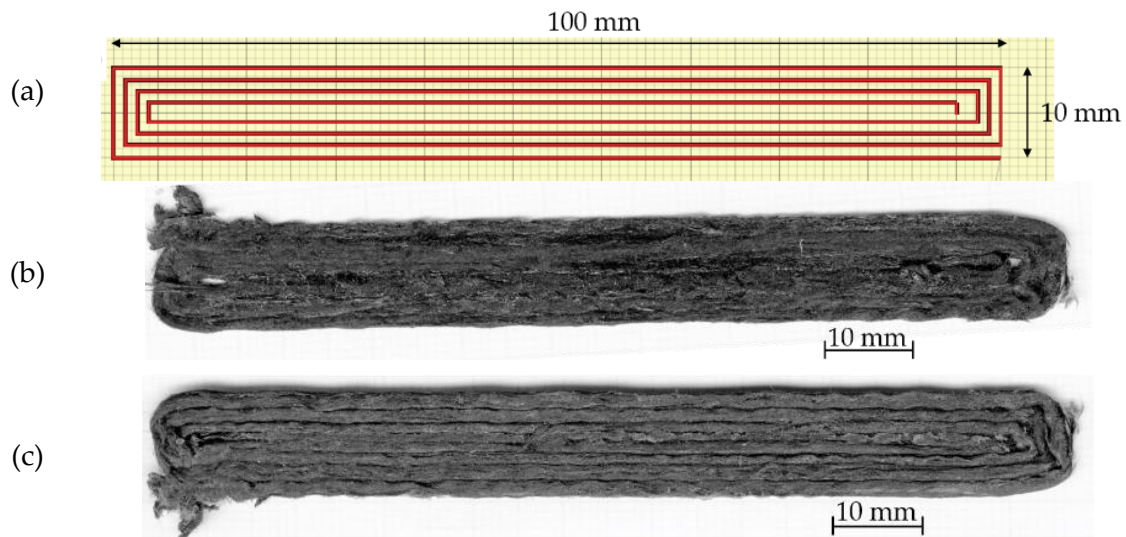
(a) Printing path of a rectangular shape with one layer; the rectangle printed part on (b) top surface; (c) side attached to the printing bed surface.
